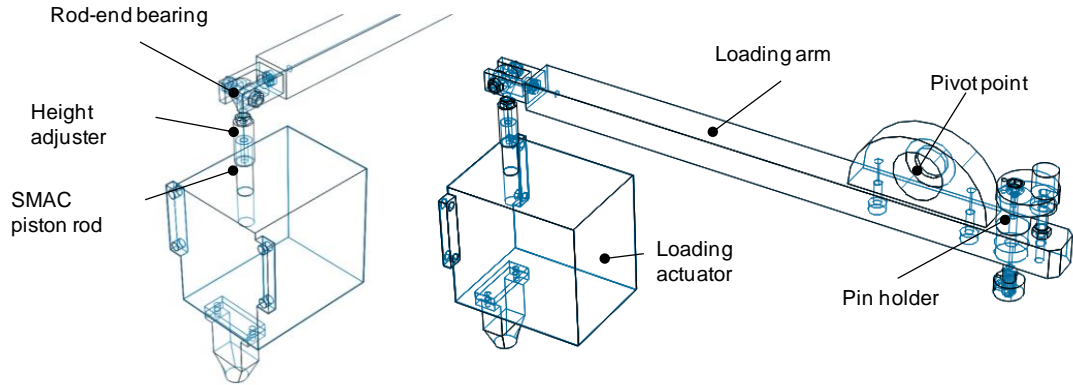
One loading module sub-assembly; consists of an electric actuator supplied by SMAC, a custom rod-end bearing which acts to transfer motion through 90degrees, a powder coated aluminium loading arm and bearing housing to pivot about and a pin holder. The angle of the loading arm can be adjusted about the horizontal through a threaded screw connector above the actuator rod or more simply at the pin holder.
